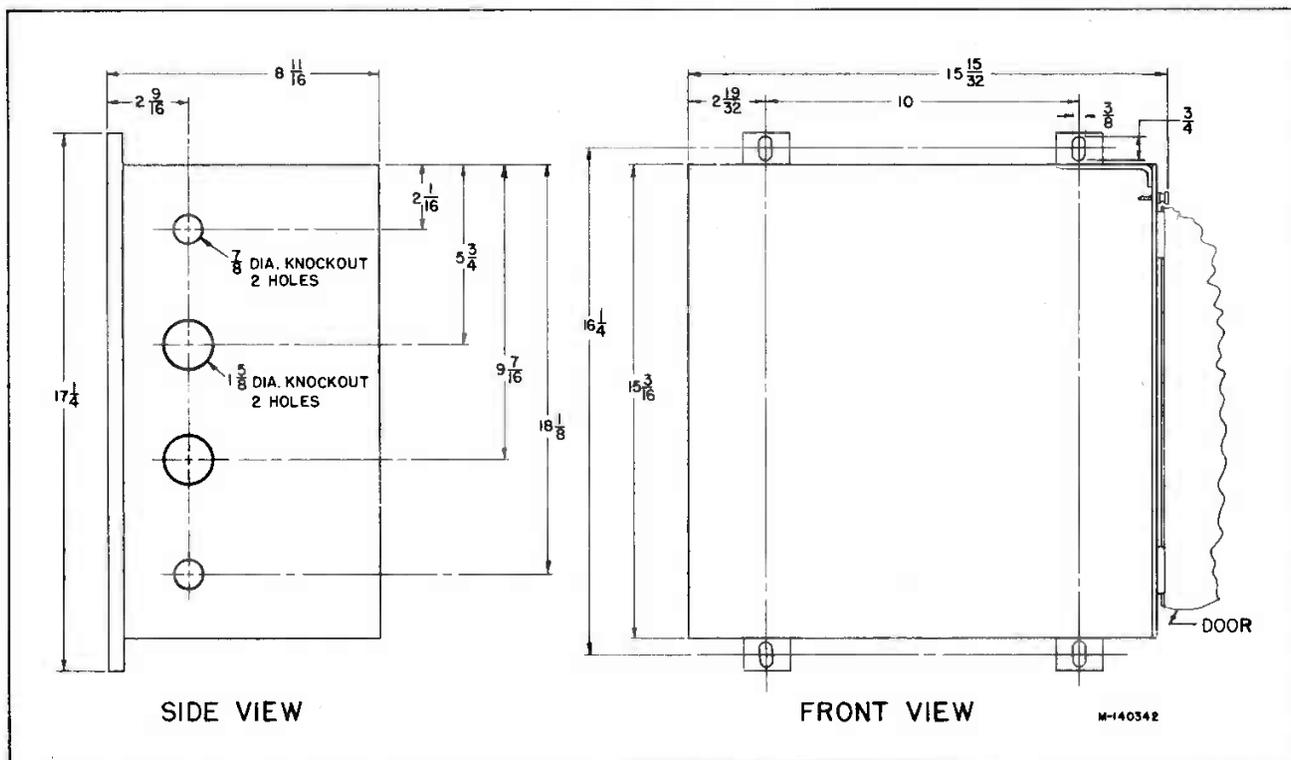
Mounting Dimensions, MI-11301-B Power Supply
